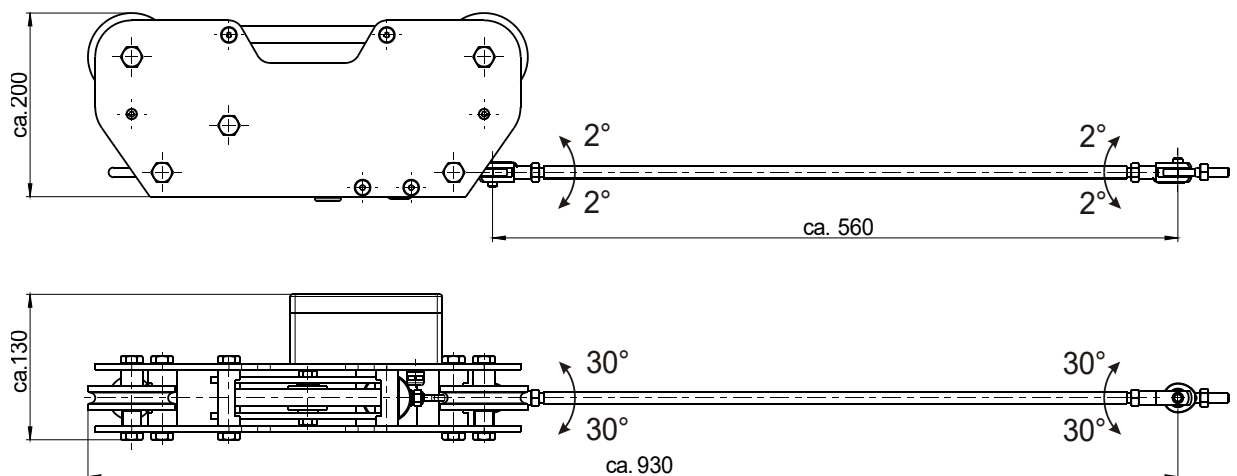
KSW-3R16 and the XKM 078.02 mounting unit
